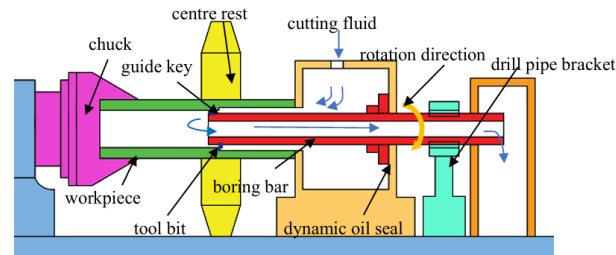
Schematic layout of the whole system of BTA deep hole machining system for full-length machining.
